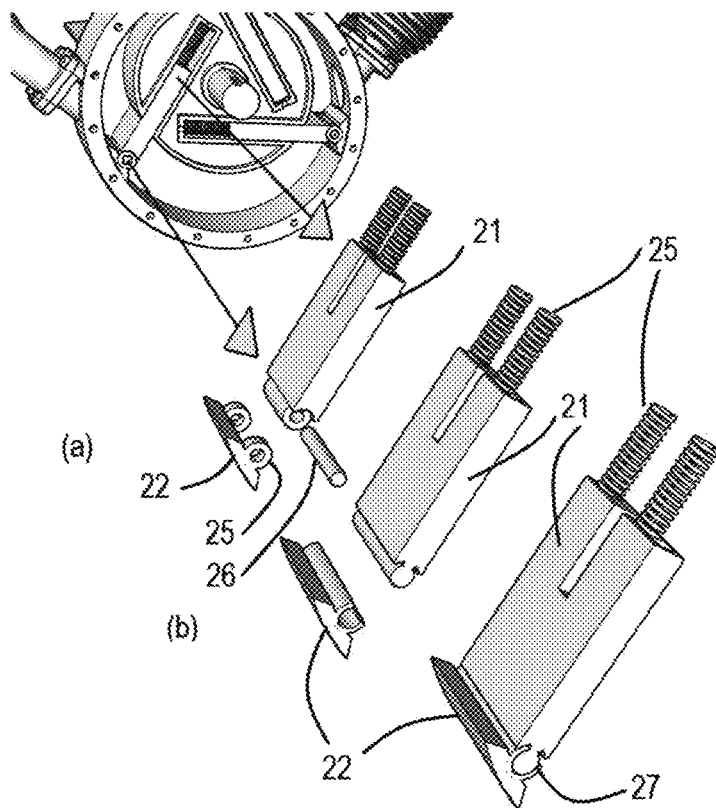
Vane embodiments for rotary type motor a) hinged shoe and b) profiled pivoted shoe.
